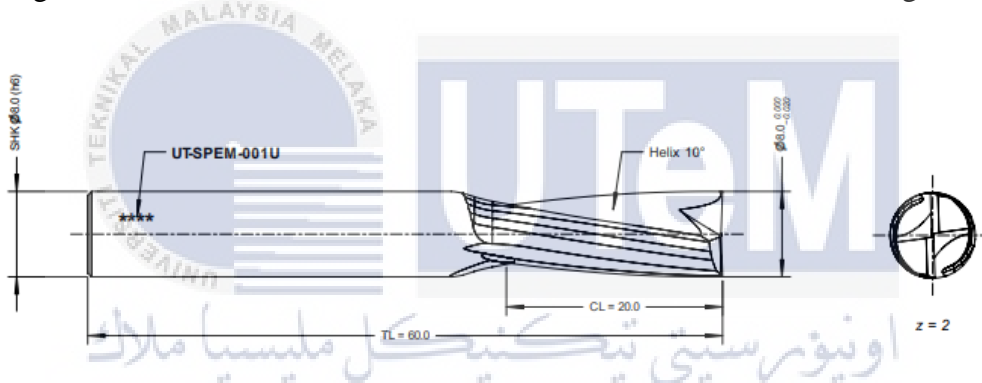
Drawing of end mill carbide with diameter 8mm, 2 flutes and helix angle 10°
